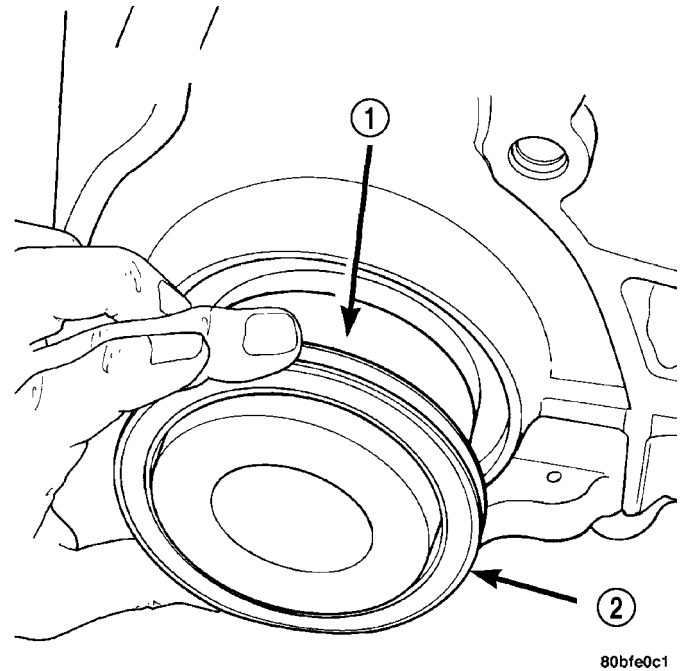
Rear Crankshaft Seal and Special Tool 6926-1
